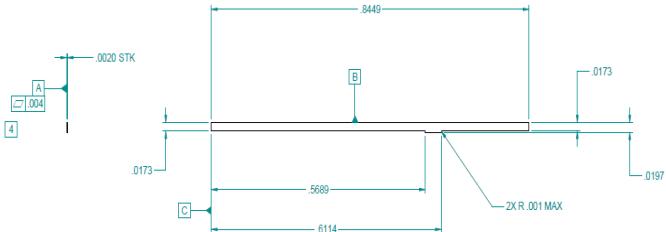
Detailed drawings of the tungsten shield shape and dimensions. Notice the protruding “tab”.
